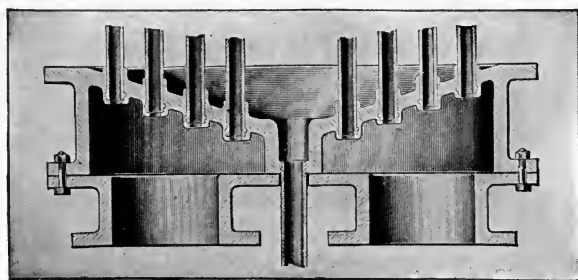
Section of Tube-plate, Bottom of Davis-Berryman Heater.
